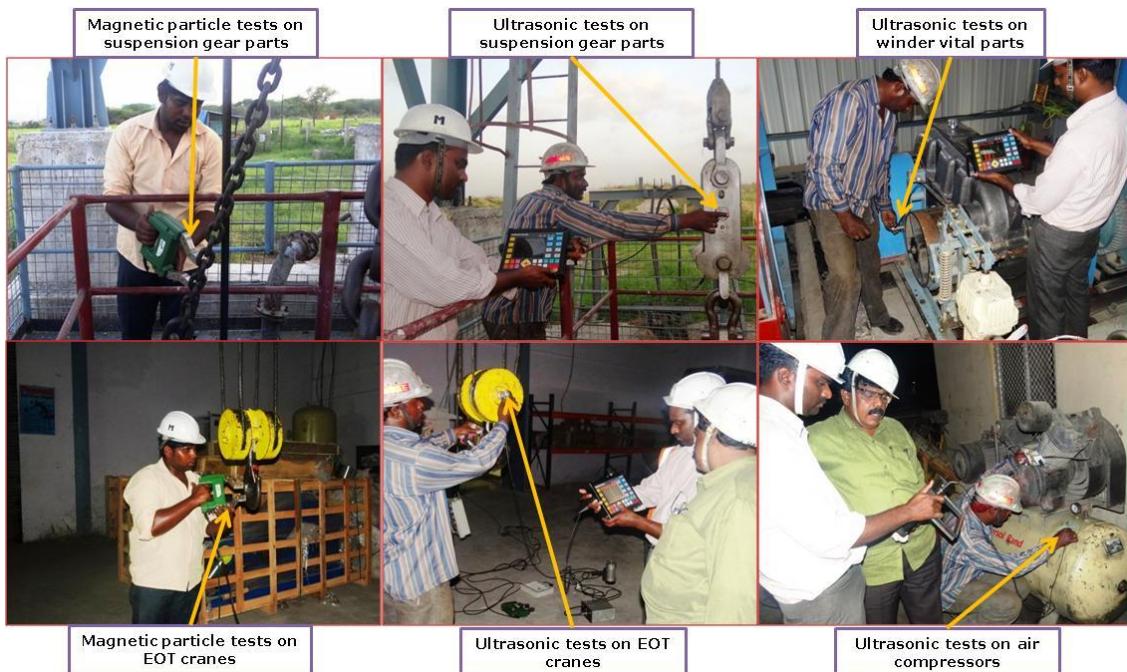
NDT on winder vital components, suspension gear parts, EOT cranes, and air compressors at Kayad mines, M/s HZL
